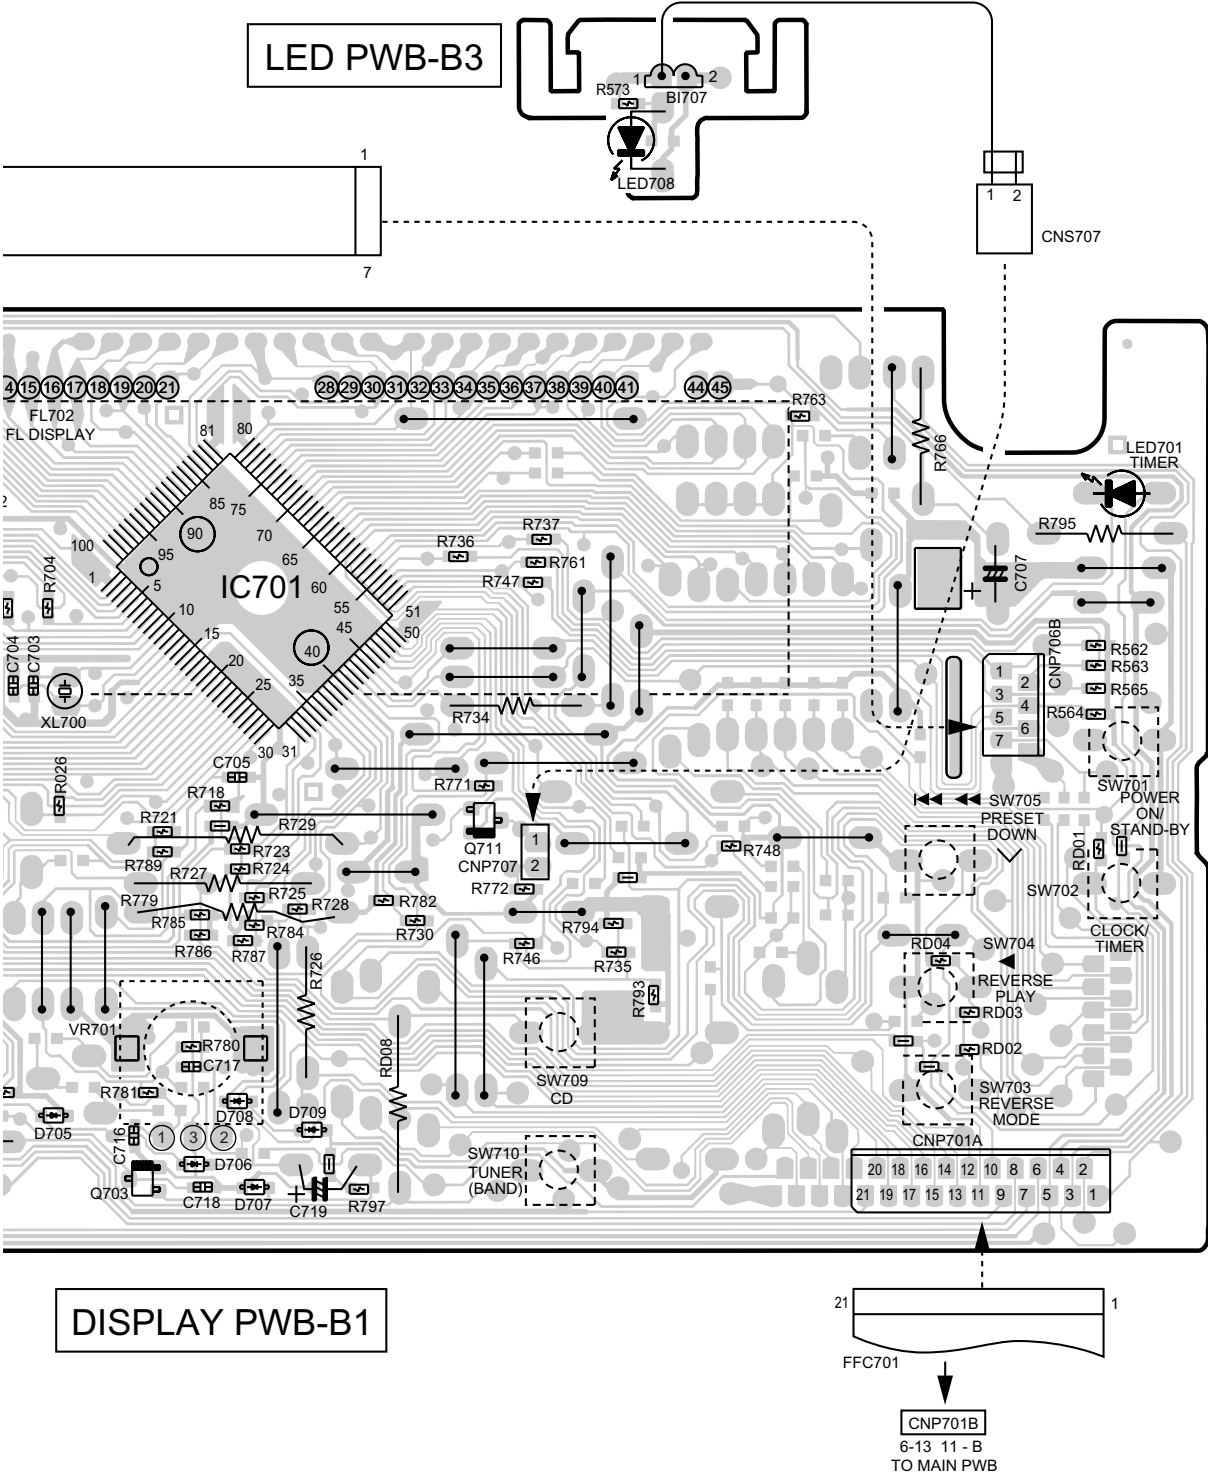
WIRING SIDE OF P.W.BOARD (4/9)
